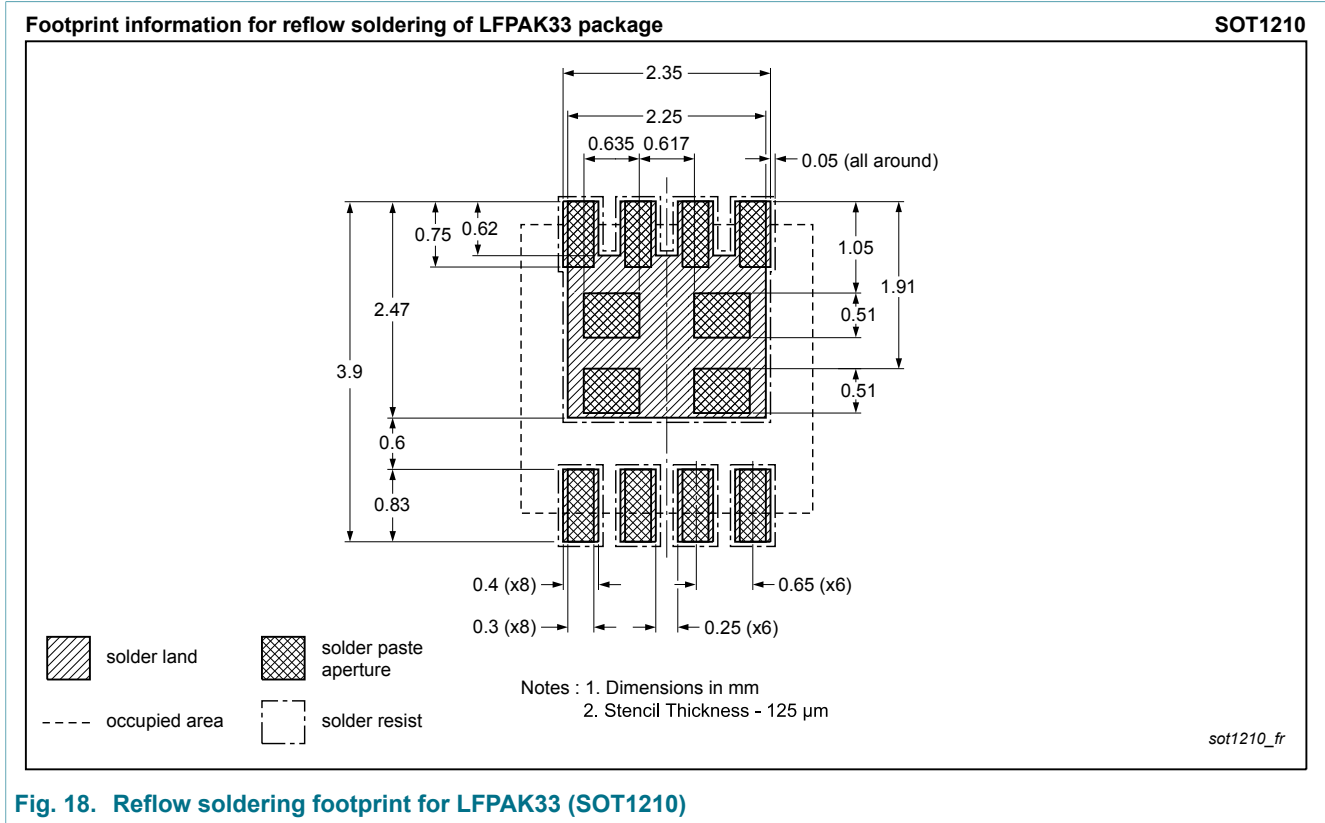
Reflow soldering footprint for LPAK33 (SOT1210)
